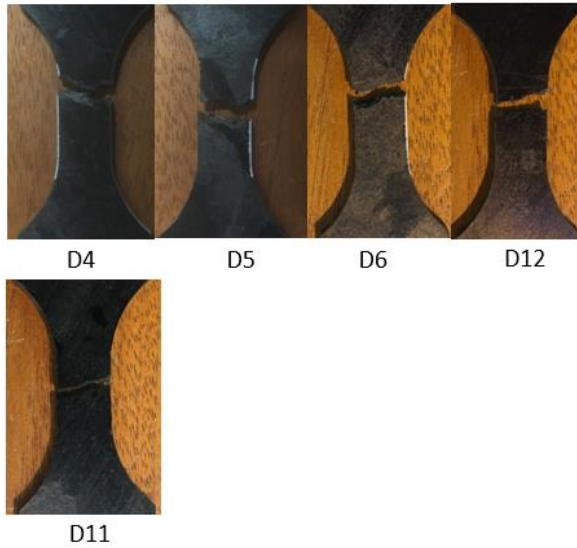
Fracture specimens for 30° coupons at R=0.
